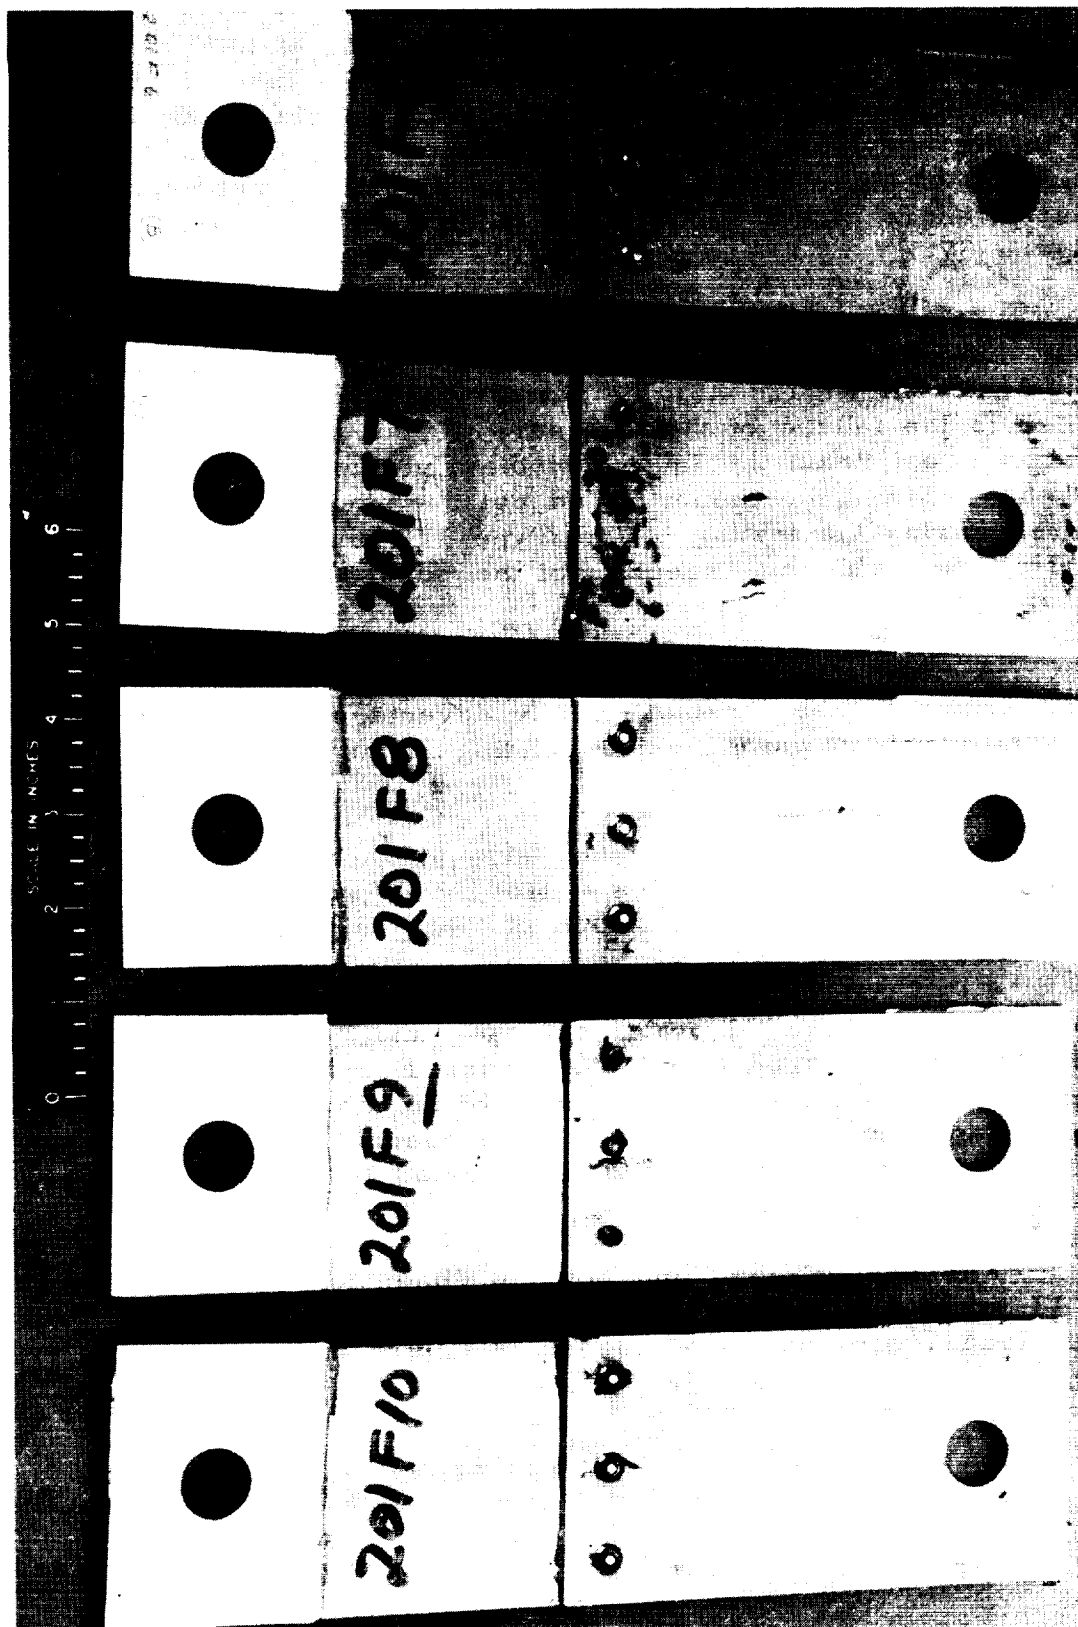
TYPE IF SPECIMENS - 0.060-INCH MATERIAL - ADHESIVE BONDING AND CHERRY BLIND RIVETS
